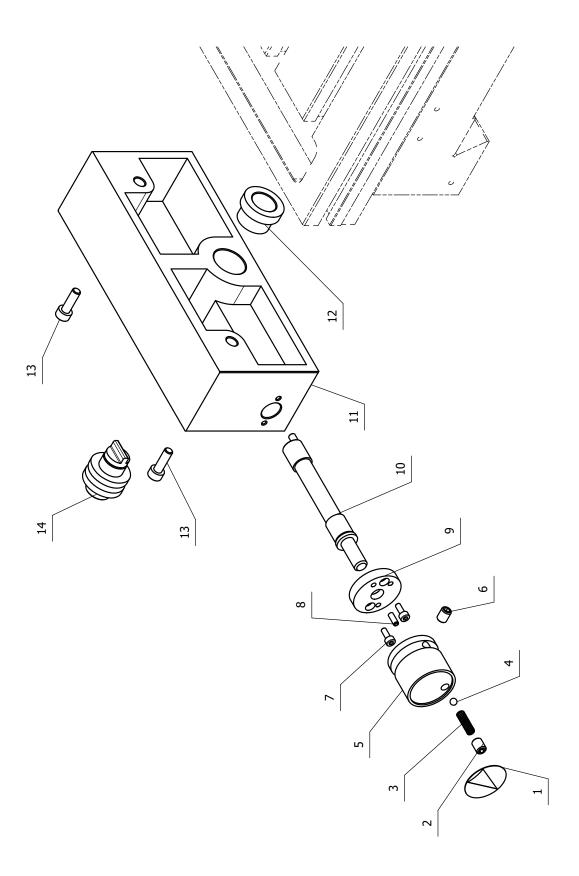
Replacement Parts Illustration for Power Feeder Clutch Assembly
